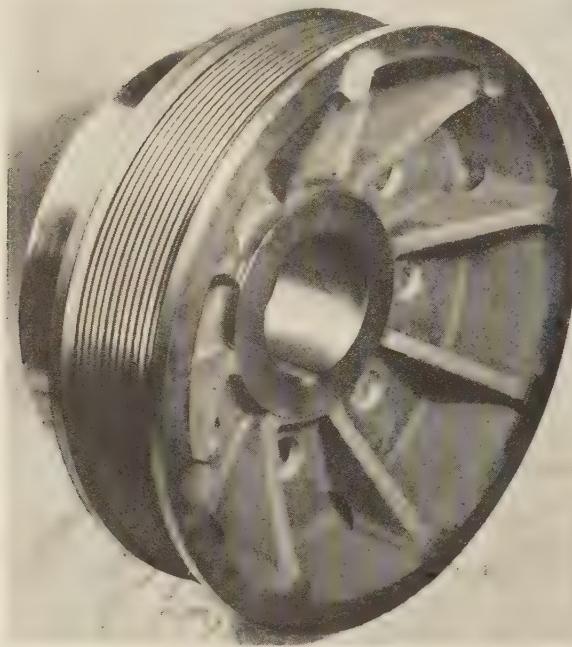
ROPE SHEAVE MACHINED FROM A CASTING
